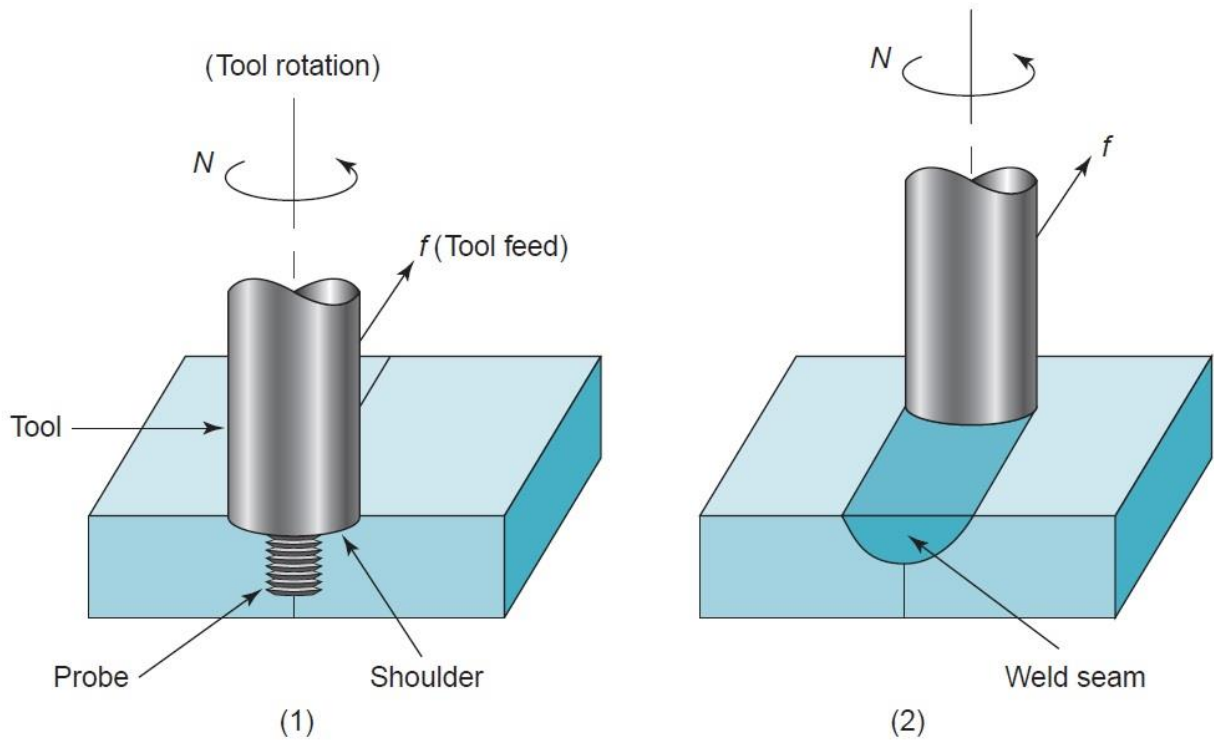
Friction stir welding (FSW): (1) rotating tool just prior to feeding into joint and (2) partially completed weld seam. N = tool rotation, f = tool feed.
